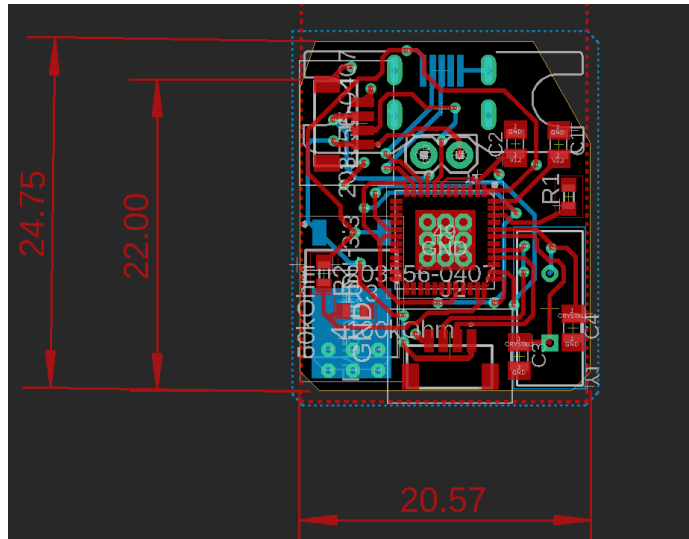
Motor Control Module USB Hub PCB - Rory Turnbull
